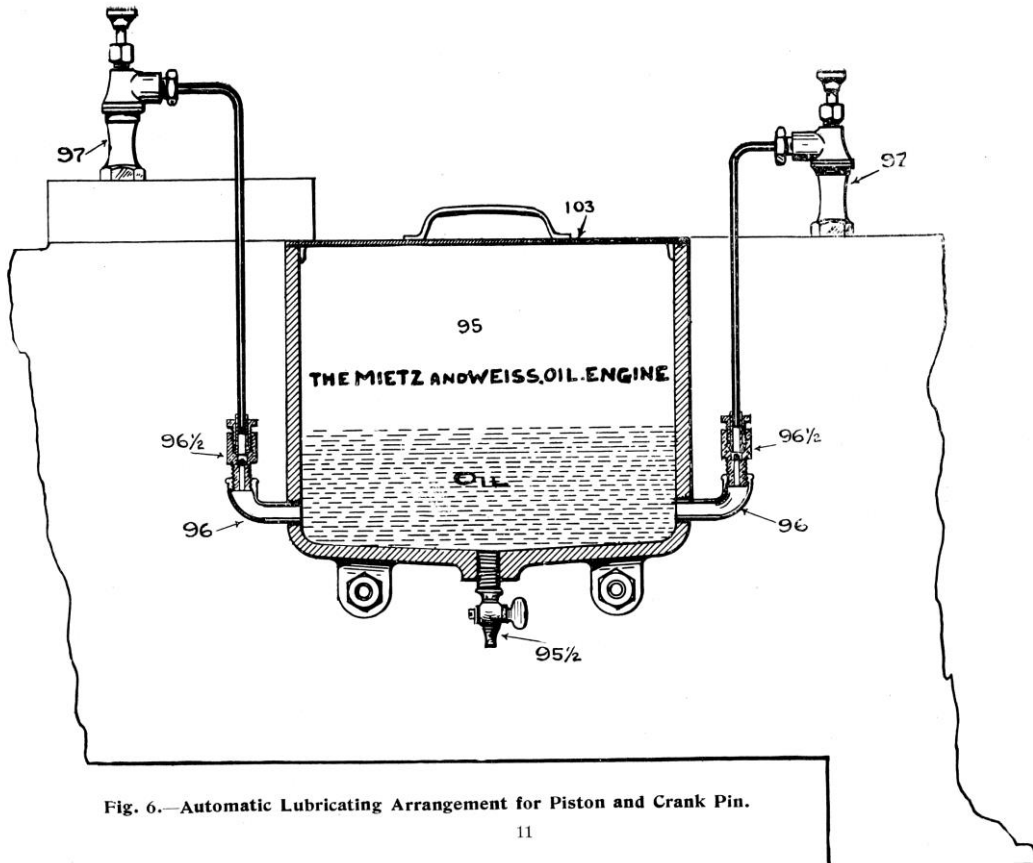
Automatic Lubricating Arrangement for Piston and Crank Pin.
